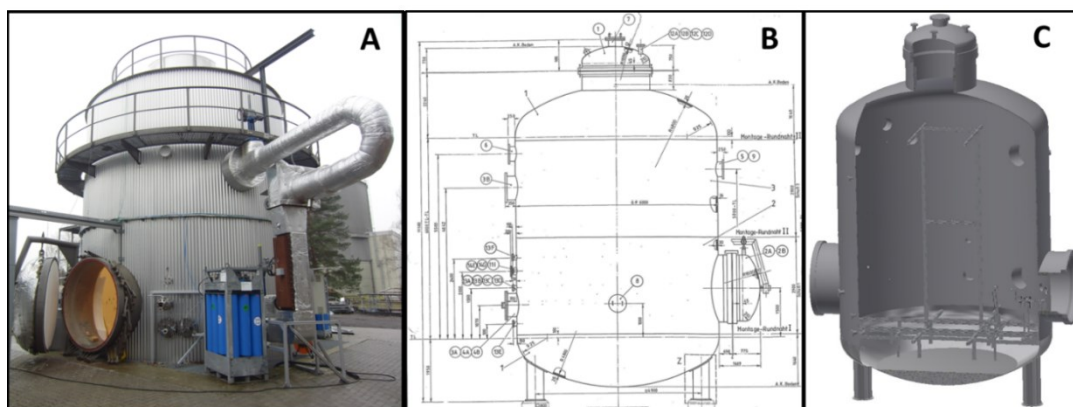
The experimental facility [8], photograph (left), technical drawing (center), CAD-drawing (right).
